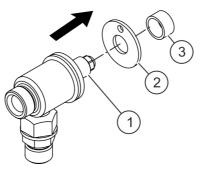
Pull off insulating sleeve and insulating washer from seal screw
